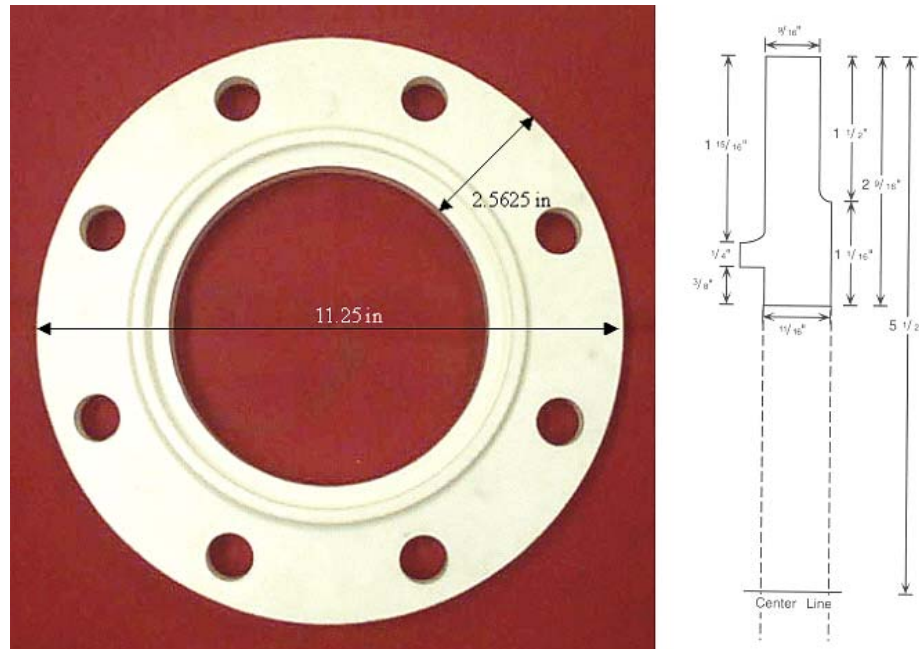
Top view of the flange pattern with a cross-sectional view on the right.
